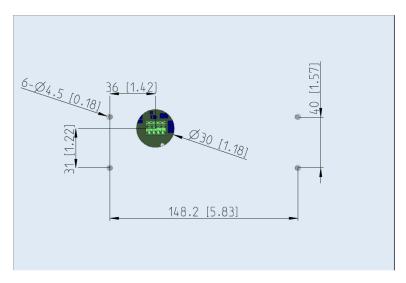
IND360 Panel Mount Cutout Dimensions
